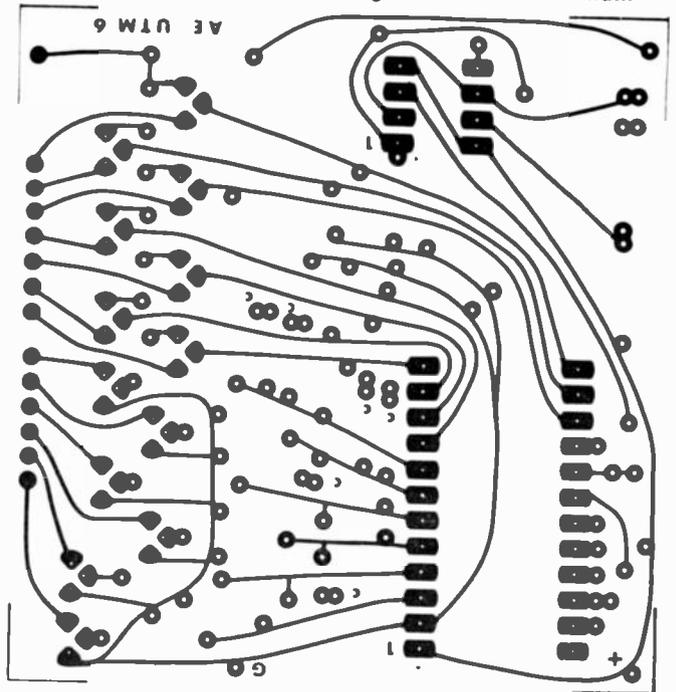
(below) FOIL PATTERN for the display board. Actual size of the board is 5½ inches wide.
